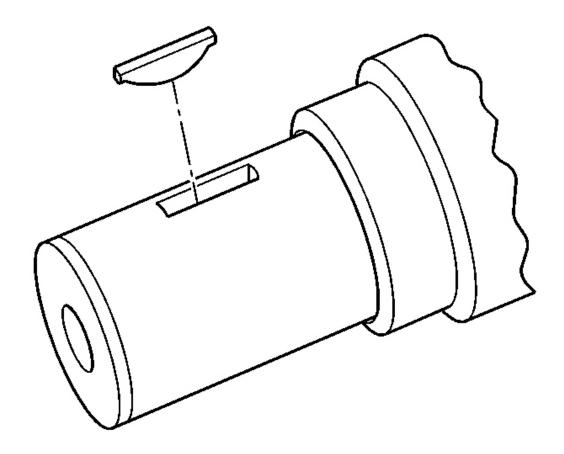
View Of Crankshaft Key & Keyway Courtesy of GENERAL MOTORS CORP.
